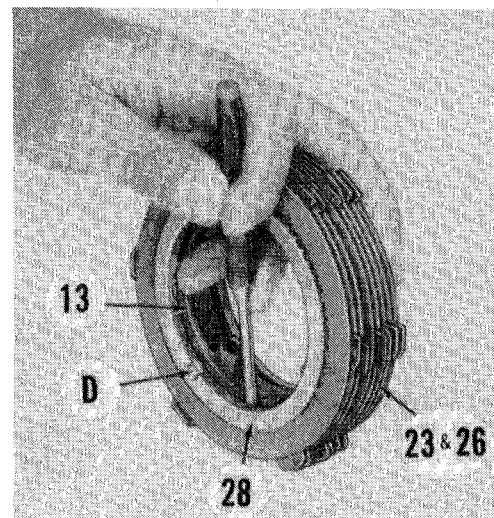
The synchronizer retainers (28) should be coated with Loctite RC609 adhesive before being staked to blocker (13). Be sure notches (D) are aligned with recesses in blocker. Do not stake retainer closer than 5/16 inch (8 mm) from notches. Refer to text.
